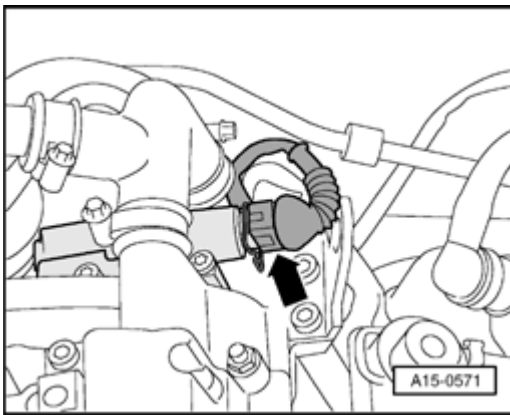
Disconnecting Connector At Camshaft Adjuster
